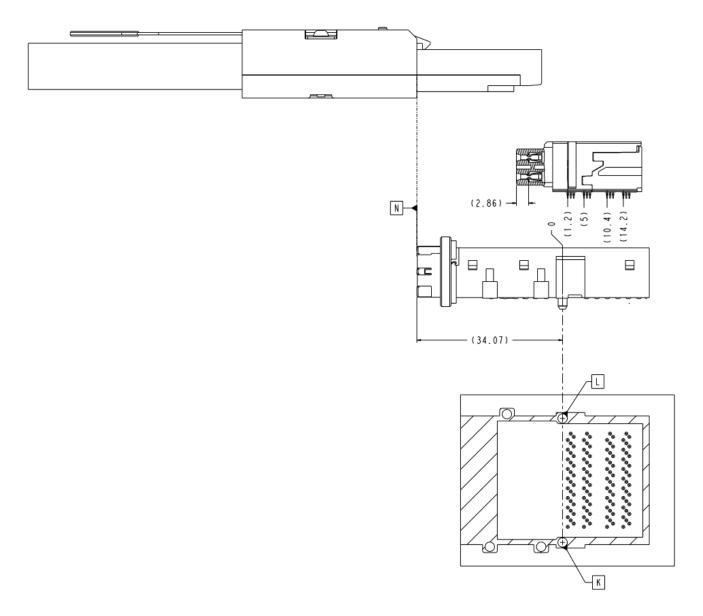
Cage, X16 Through-Hole Connector, Module Alignment
